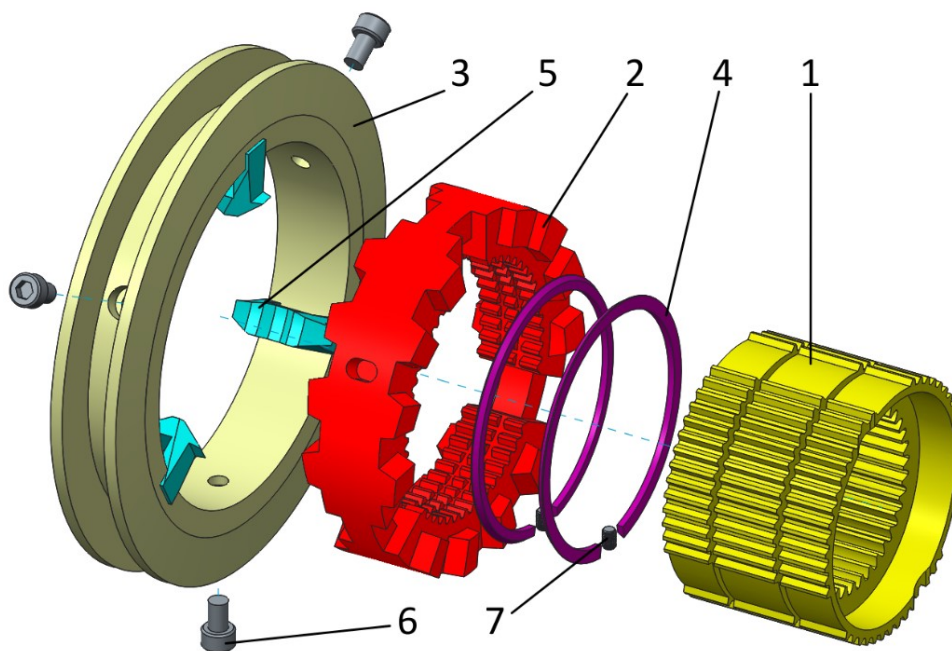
Dog clutch with blocking mechanism – exploded view [43]
